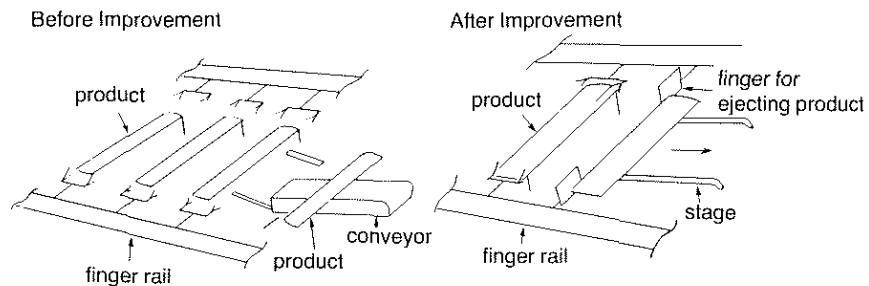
Improved Setup for Accessory Transfer Die Equipment
